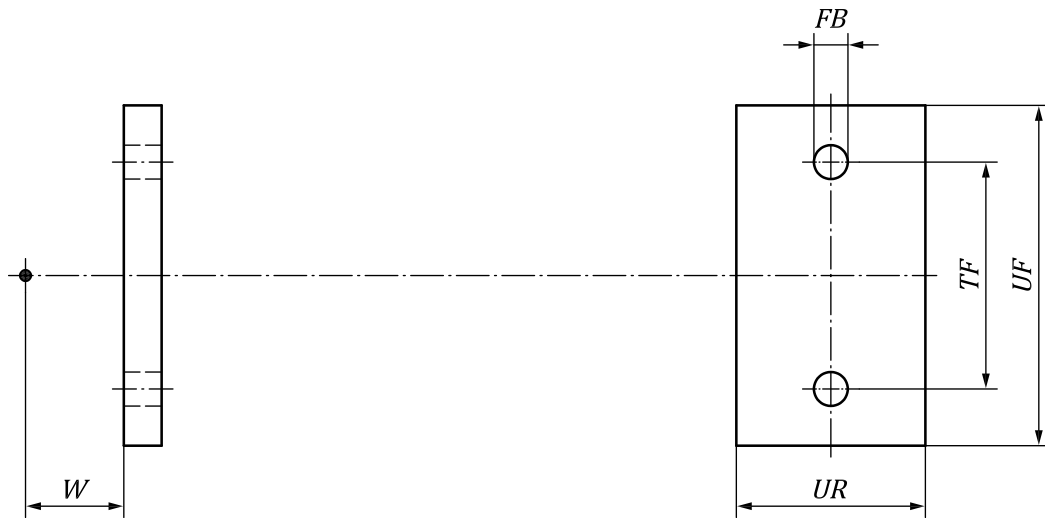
Head rectangular flange (two hole) mounting (MF8)
